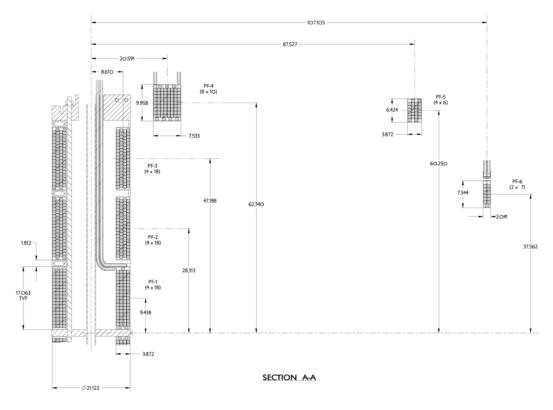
PF coil geometry with upgraded solenoid assembly
